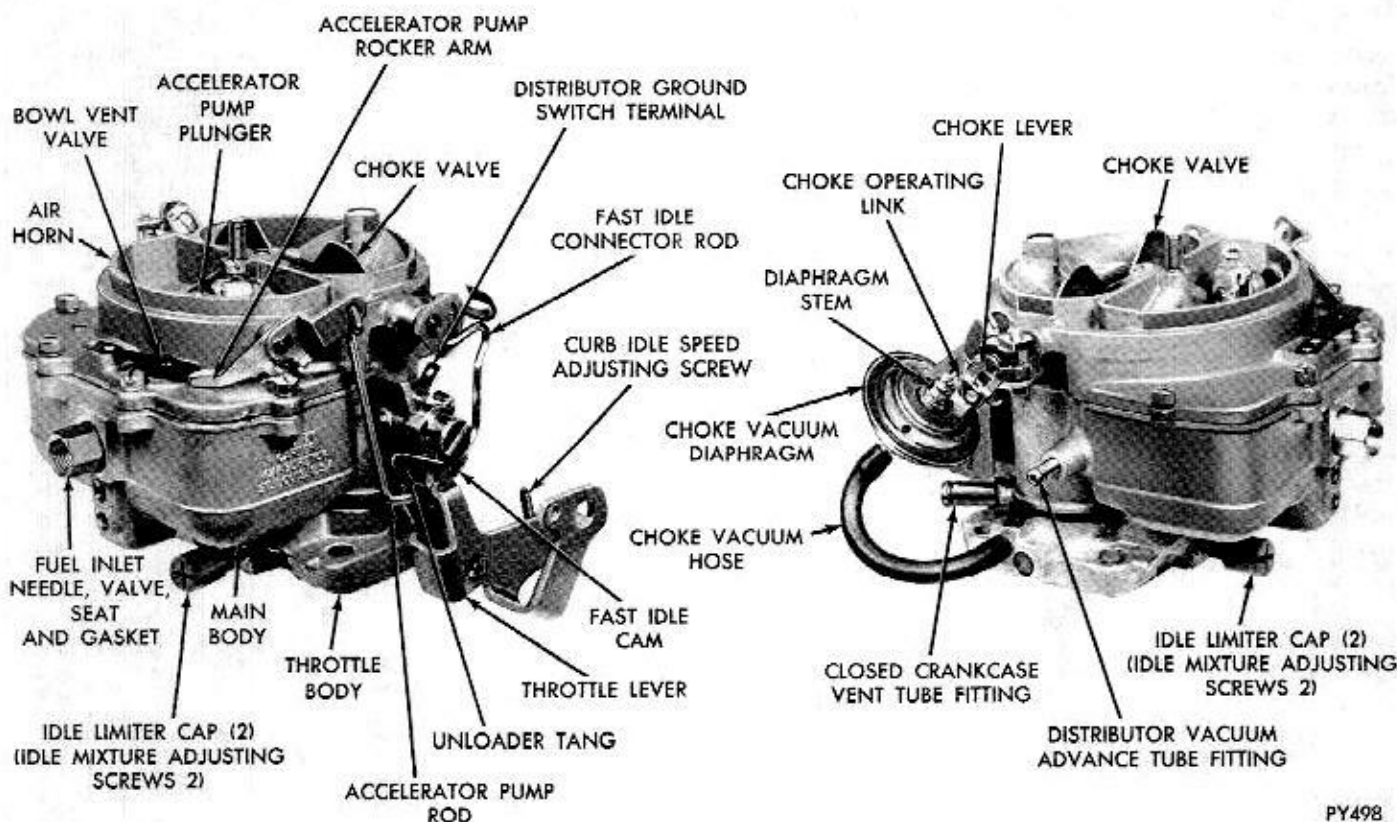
Carburetor Assembly (BBD-1-1/2 inch) C.A.S.
